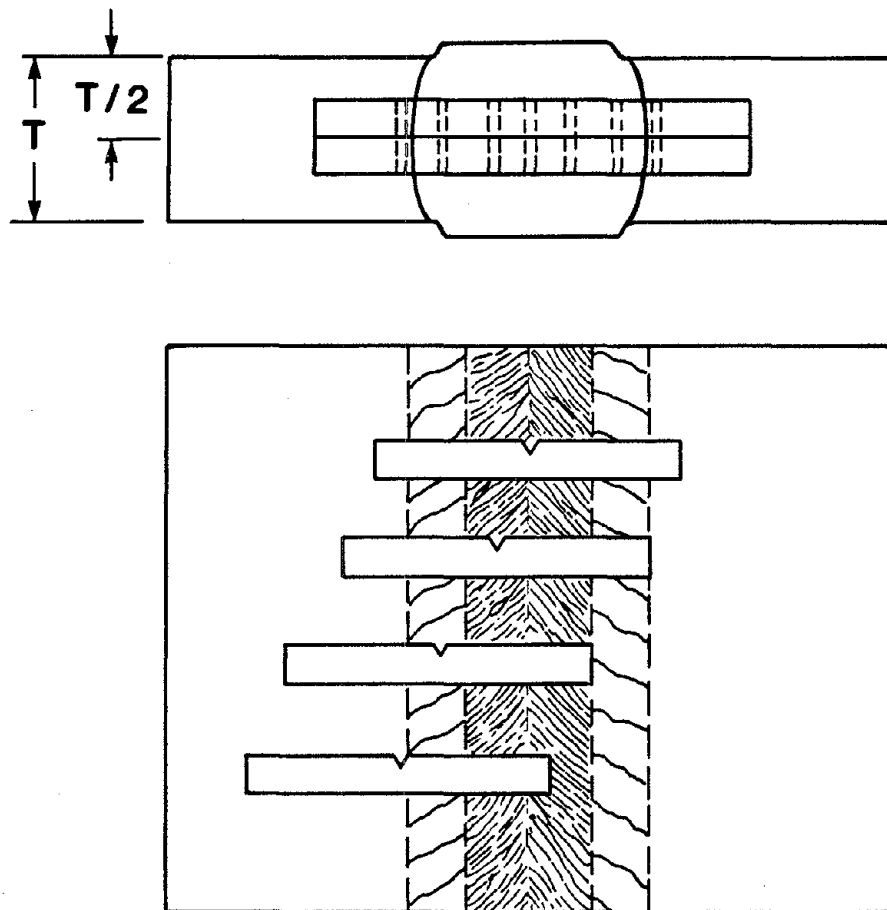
CVN specimen location configuration for ES welds. (Schematic.)
